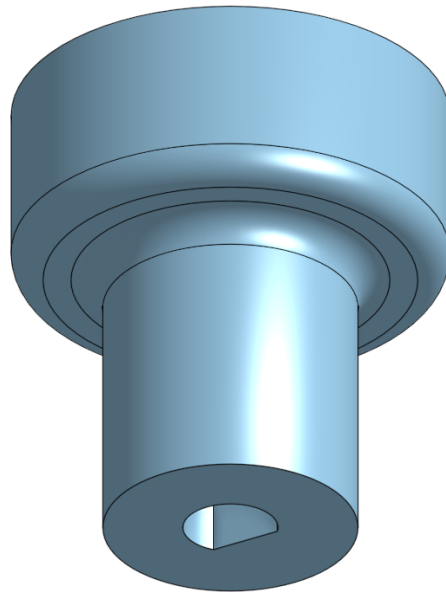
Lead screw to motor adapter CAD model: Bottom isometric
